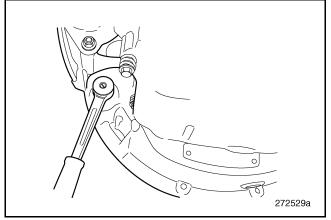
Turning Flywheel (MP8 Shown, Typical)
